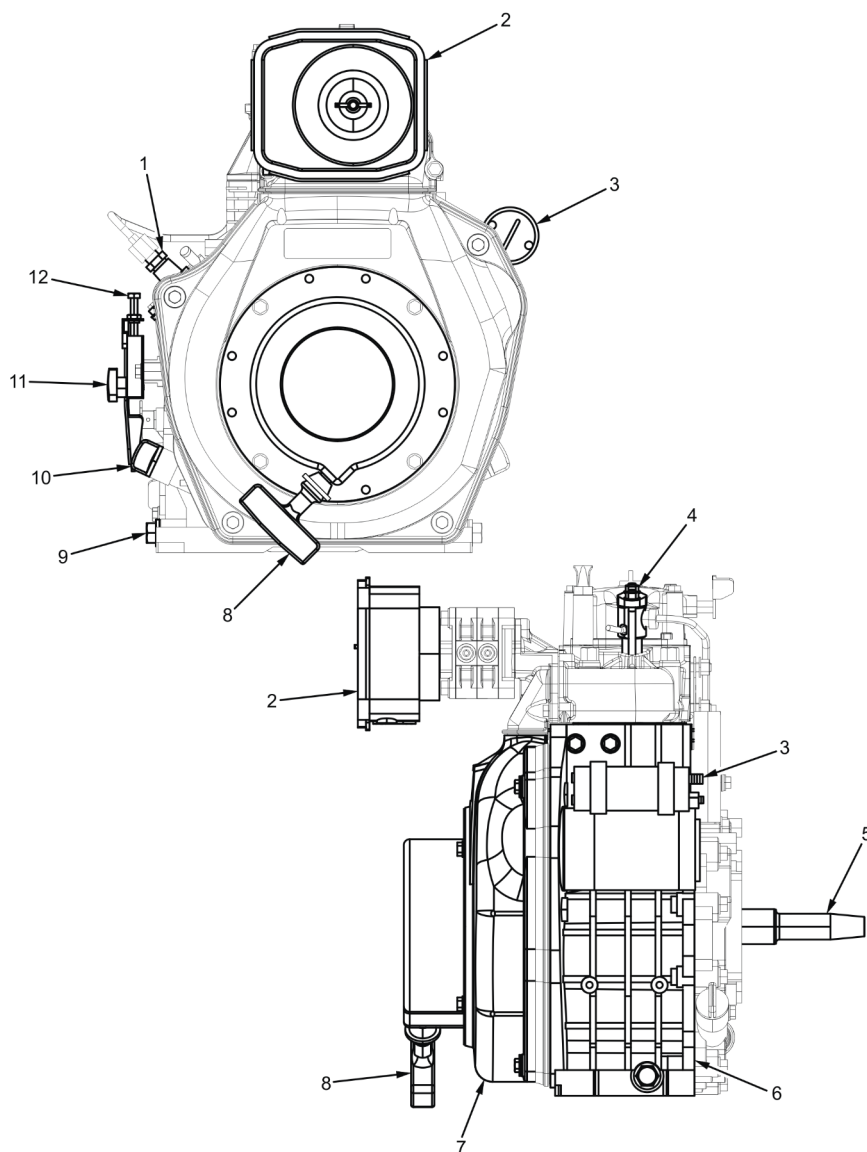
Location Of Engine Assembly Components Model L70AE-DEGFR.
